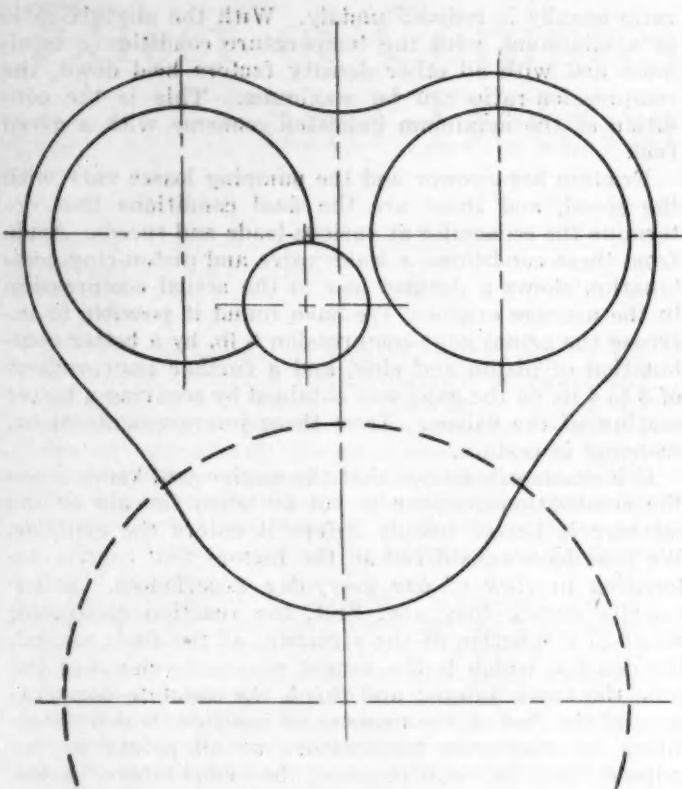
SPECIALLY SHAPED COMBUSTION-CHAMBER HEAD IN WHICH THE SPARK-PLUG LOCATION WAS CHOSEN TO GIVE UNIFORM DISTANCES TO THE MOST REMOTE SECTIONS
